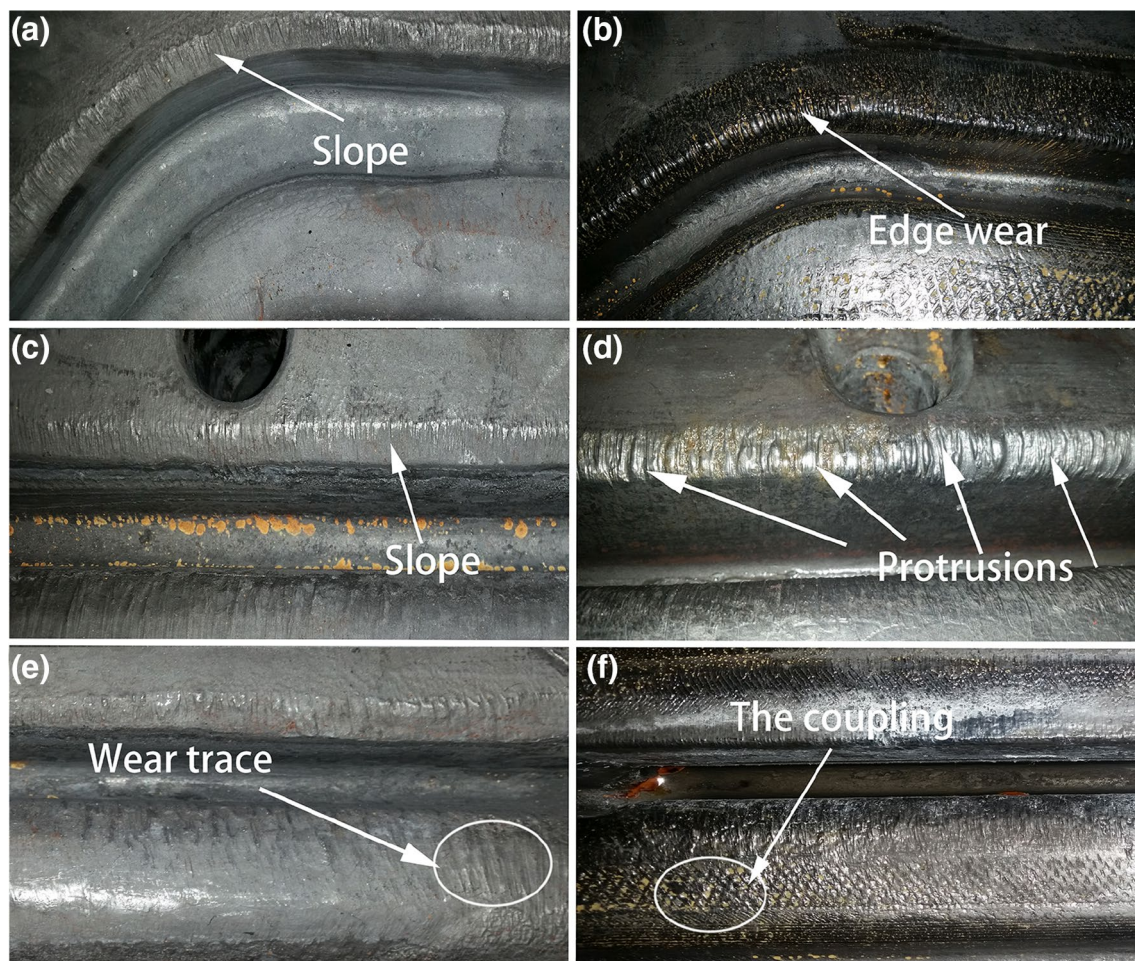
Surface fatigue wear after failure of the mold and remelting. a, b the bending part of the forging; c, d the straight part of the forging; e, f the boss of the forging
